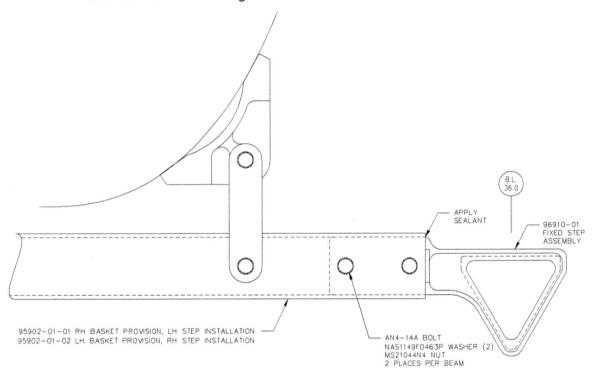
Fixed Step Installation (96901-01-02 shown, all others similar)
